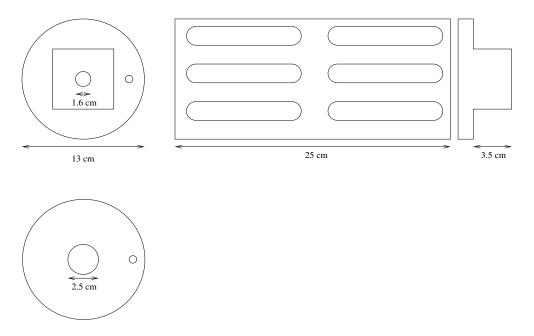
Expansion Chamber Design. This is a schematic of the expansion chamber with the relevant dimensions.
